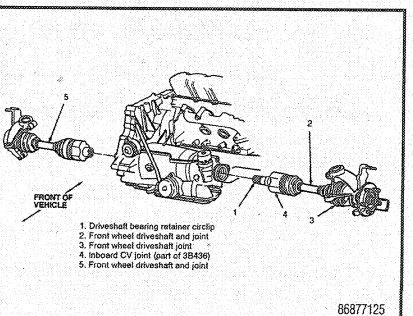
Exploded view of the halfshaft assemblies and related components—automatic transaxle
